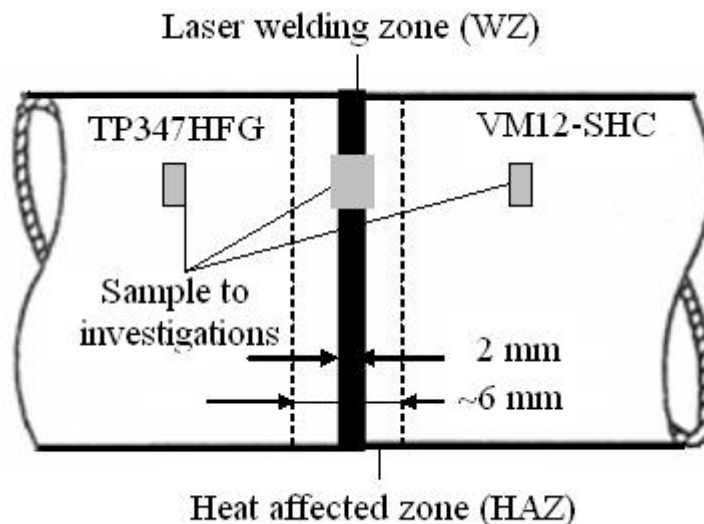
Schematic diagram of laser welded joint of TP347HFG and VM12-SHC stainless steels
